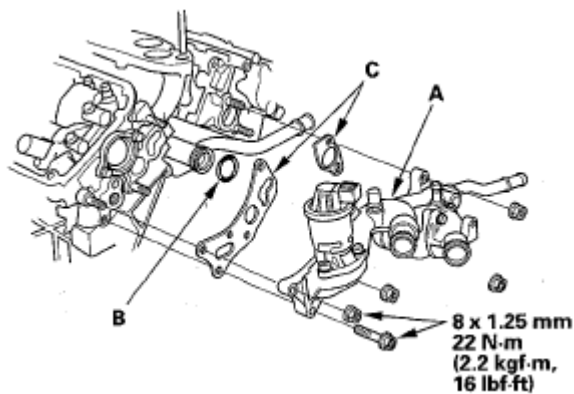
Identifying Water Passage, O-Ring And Gaskets With Torque Specifications
